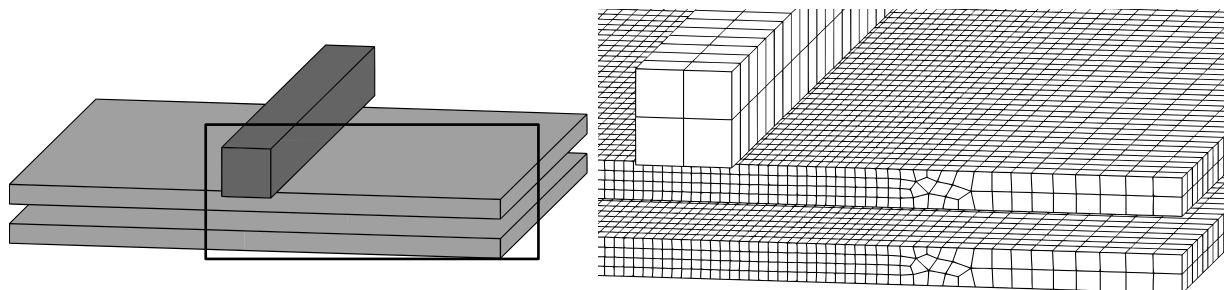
Geometry and mesh for the electromagnetic pulse welding setup.
